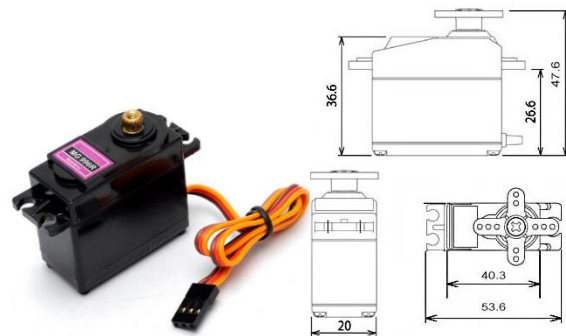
Real view of MG996 servo motor with its dimensions drawing
